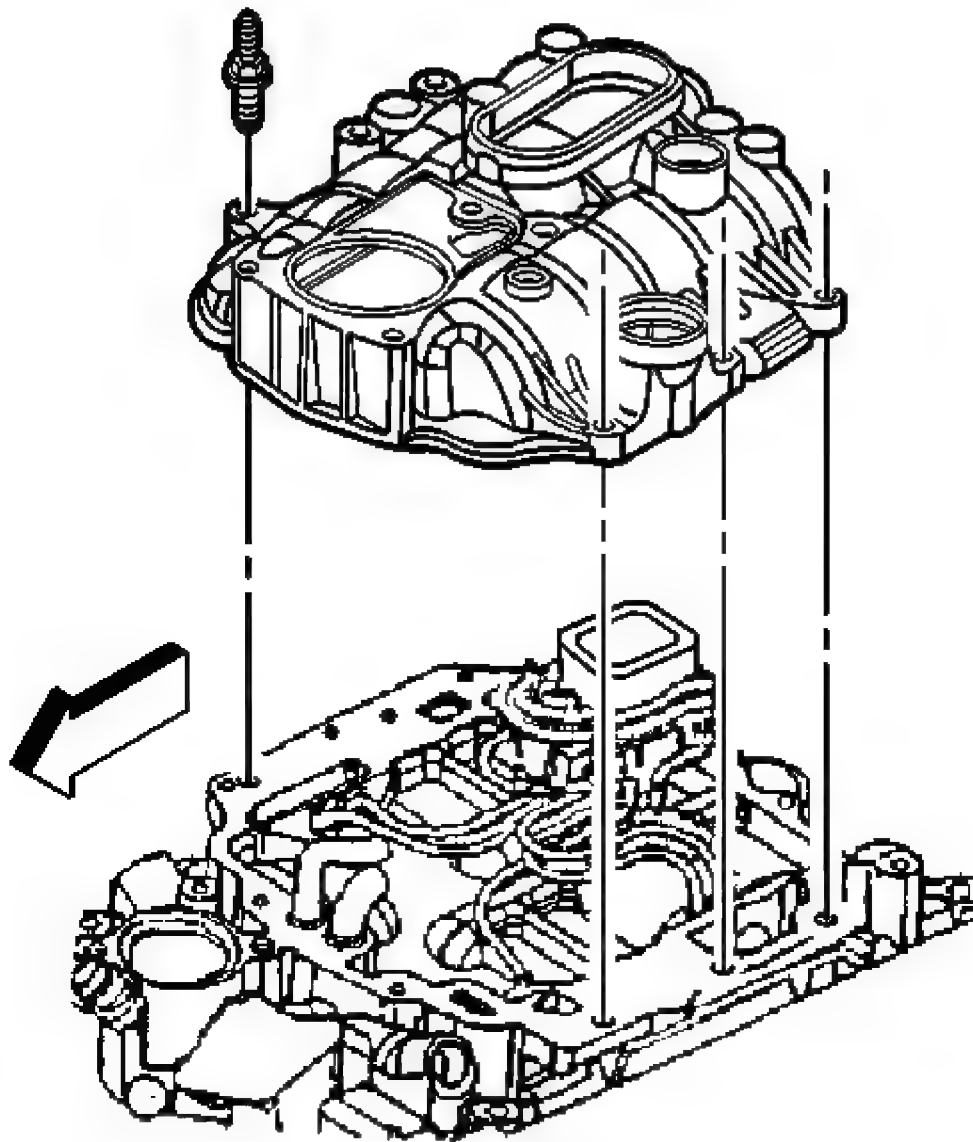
Installing Upper Intake Manifold Onto Lower Intake Manifold
